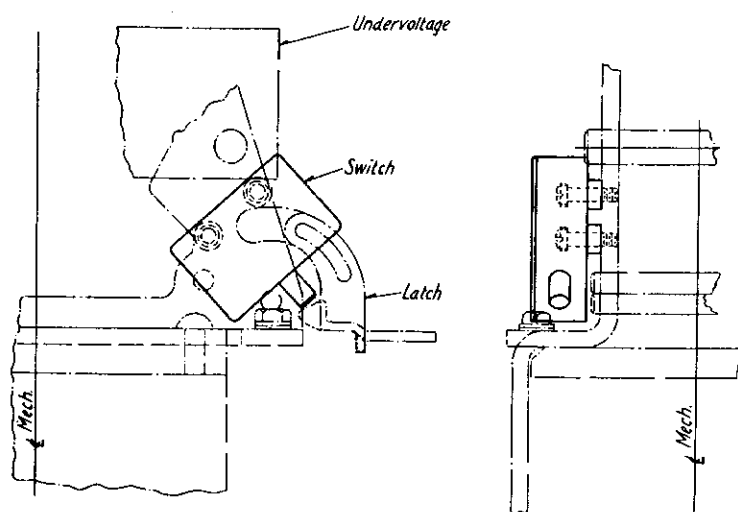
LATCH CHECKING SWITCH ASSEMBLY
